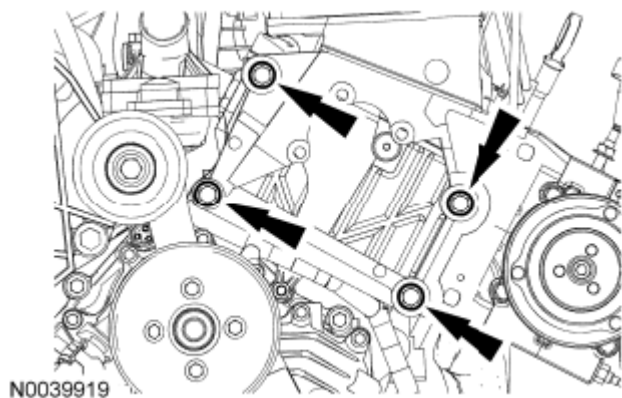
Locating A/C Compressor And Power Steering Pump Bracket With Bolts
